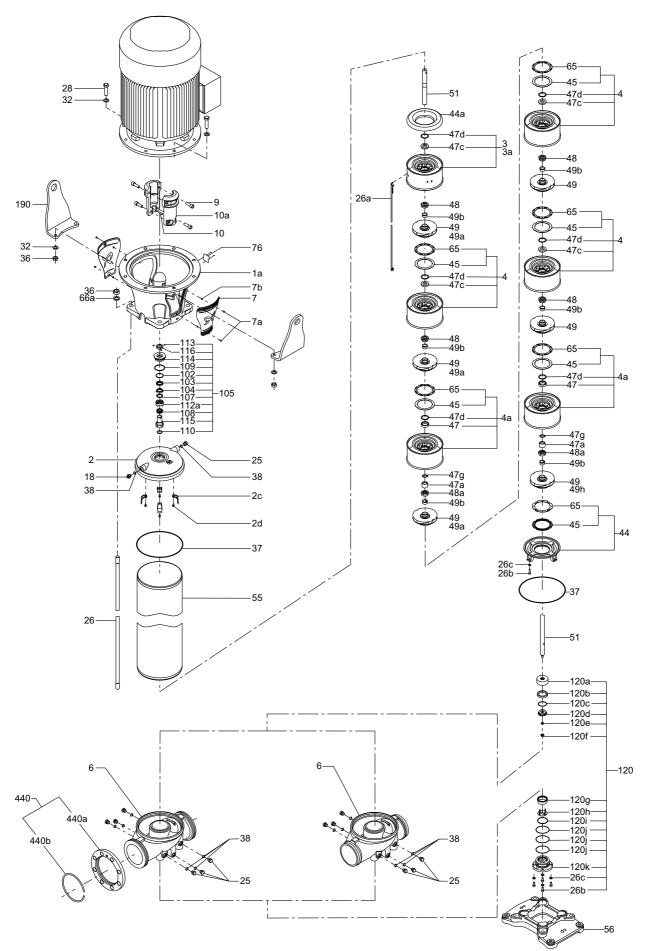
Exploded view of CR, CRN pump with $\varnothing 28$ or $\varnothing 36$ shaft and with thrust-handling device
